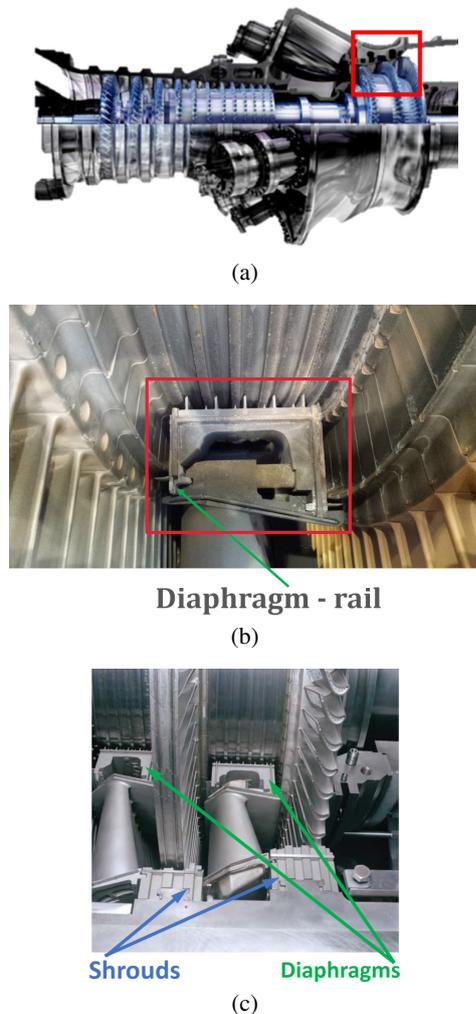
Cross overview of the gas turbine (a); Cross-section through turbine shell (b); Power nozzle assembly with marked diaphragm (c)
